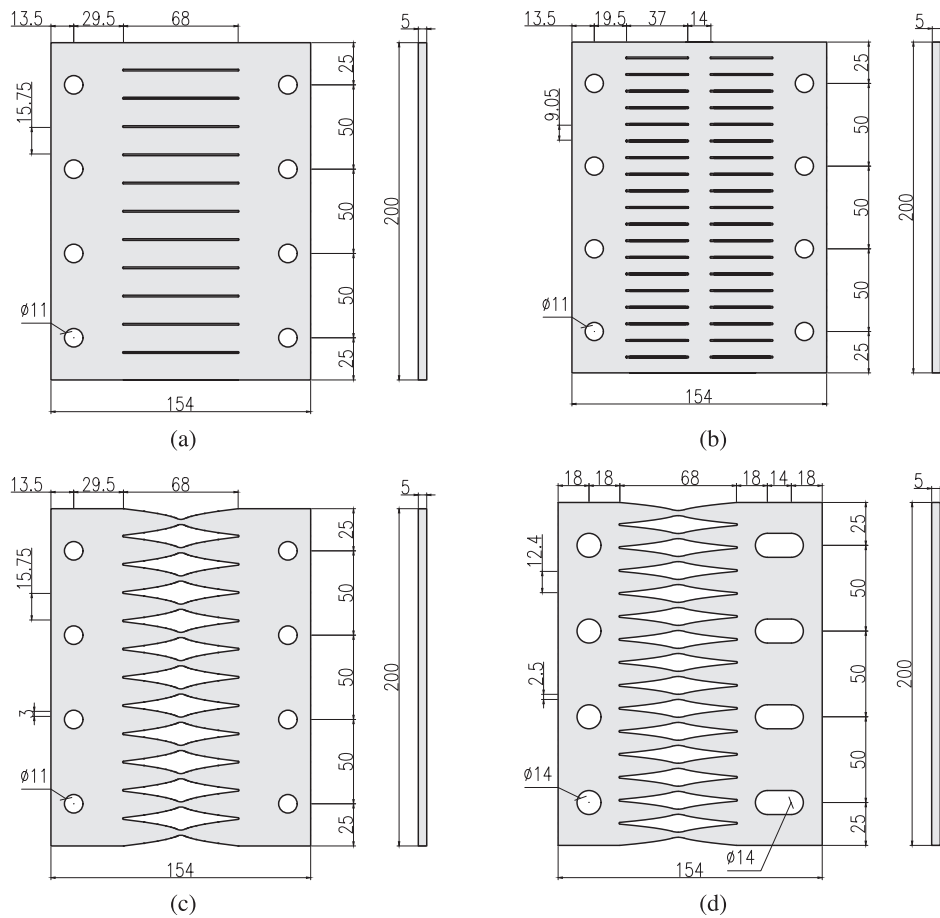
Geometry and dimensions of the tested MSDs [mm]: (a) one line of beams (I); (b) two lines of beams (II); (c) hourglass-shaped beams (III); (d) hourglass-shaped beams and horizontal slots (IV).
